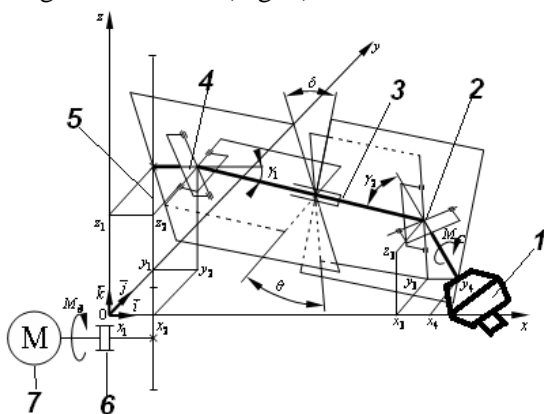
Kinematic diagram of the drive power line of the piercing mill of PRU with universal spindles: 1 - working roll; 2, 4 - Guk's hinge; 3 - spindle shaft; 5 - reducer; 6 - coupling; 7 - electric motor
